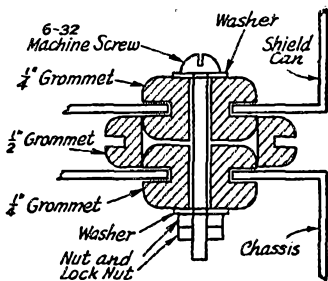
Method of using rubber grommets to provide cushioned mounting for the vibrator-transformer shield can.
